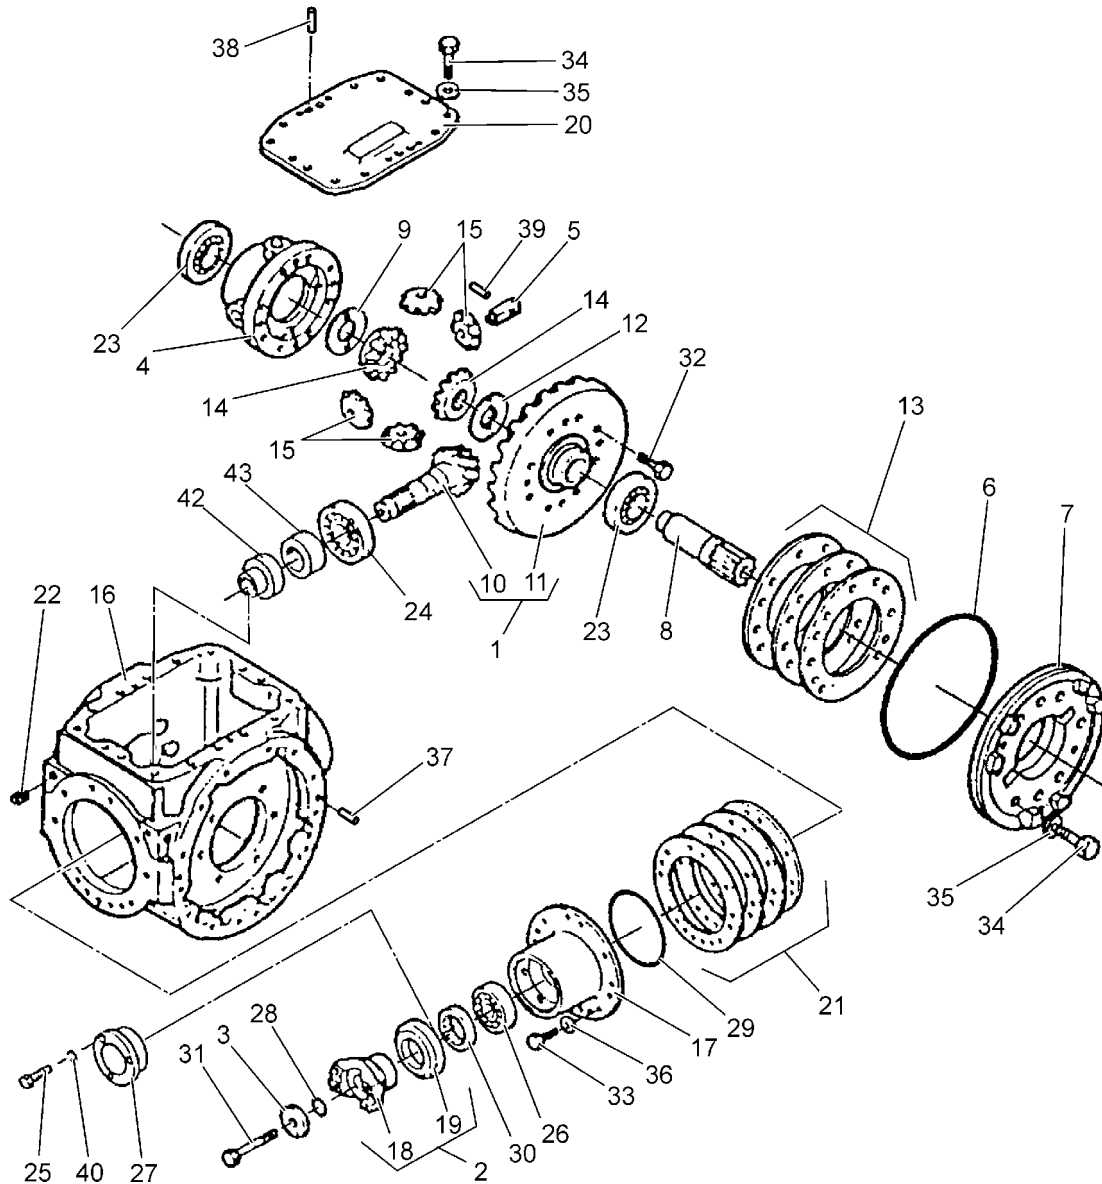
D.47. Rear Axle Differential Assembly Exploded View (520G)
